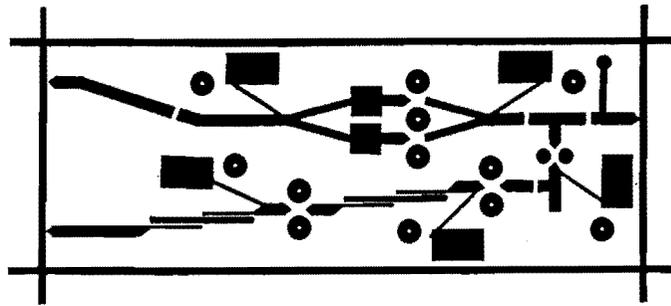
5760MHz RF front-end PCB (0.8mm double-sided FR4).
